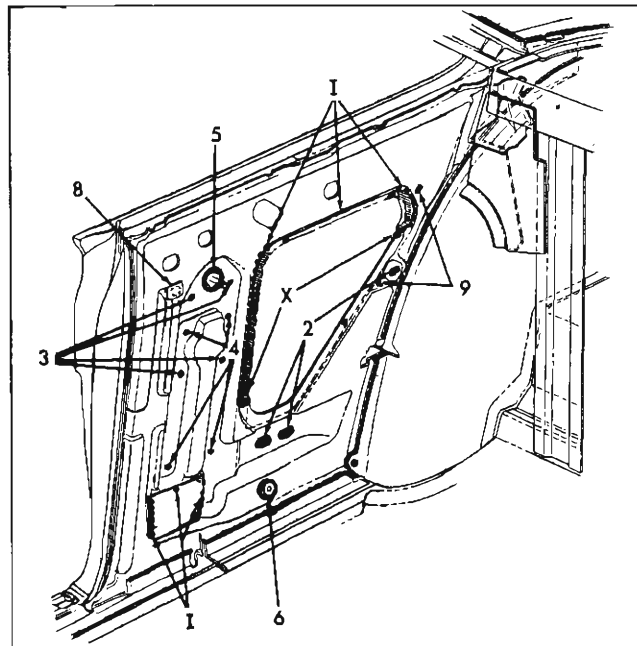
Rear Quarter Inner Panel Sealing—47 Styles
